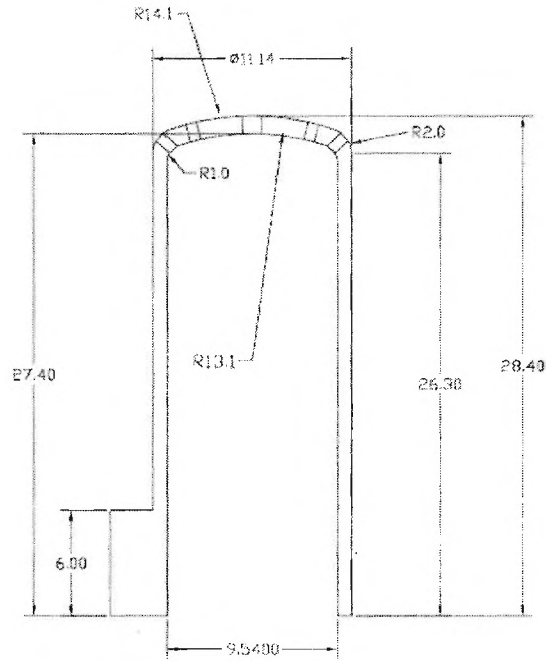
Drawing of the jet cartridge from AutoCad 2006.
